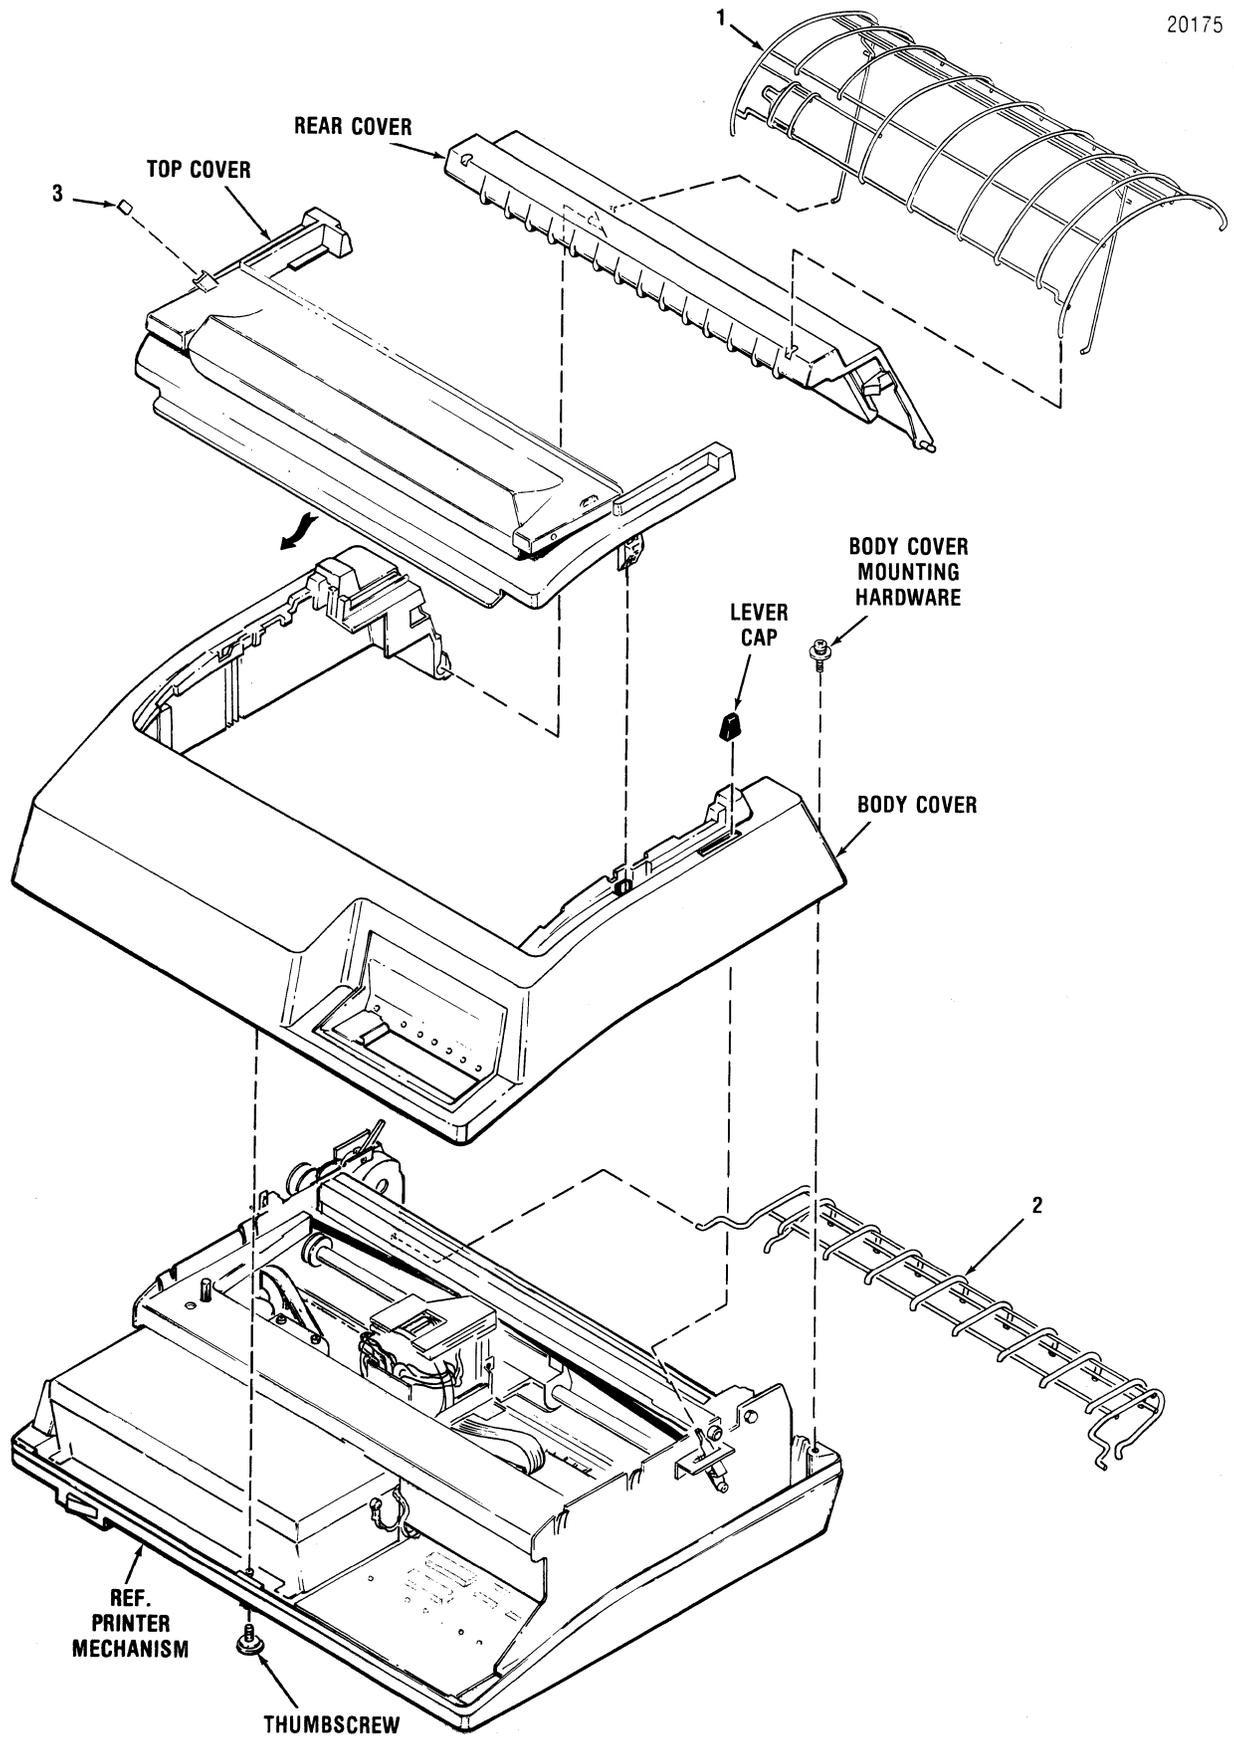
REMOVAL/REPLACEMENT PAPER RACK OUTLET ASSEMBLY, PAPER RACK INLET, COVER ASSEMBLIES AND COVER INTERLOCK MAGNET
